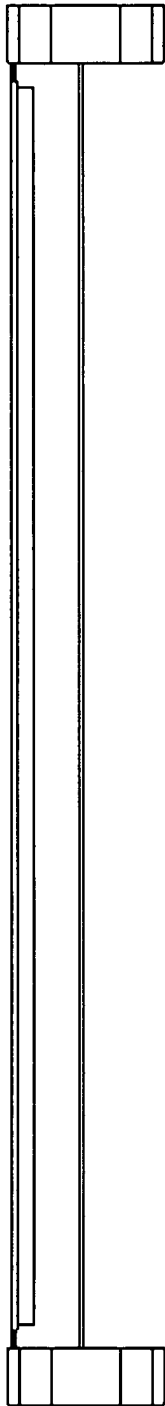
C: Right view of a ceiling frame (20 foot collapsible cargo container)
